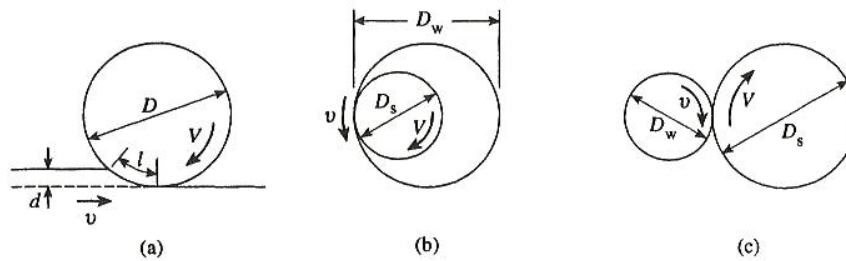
Image detailing the different types of grinding techniques currently utilised in manufacturing after Shaw [6]; (a) Surface Grinding, (b) Internal Grinding & (c) External Grinding.
